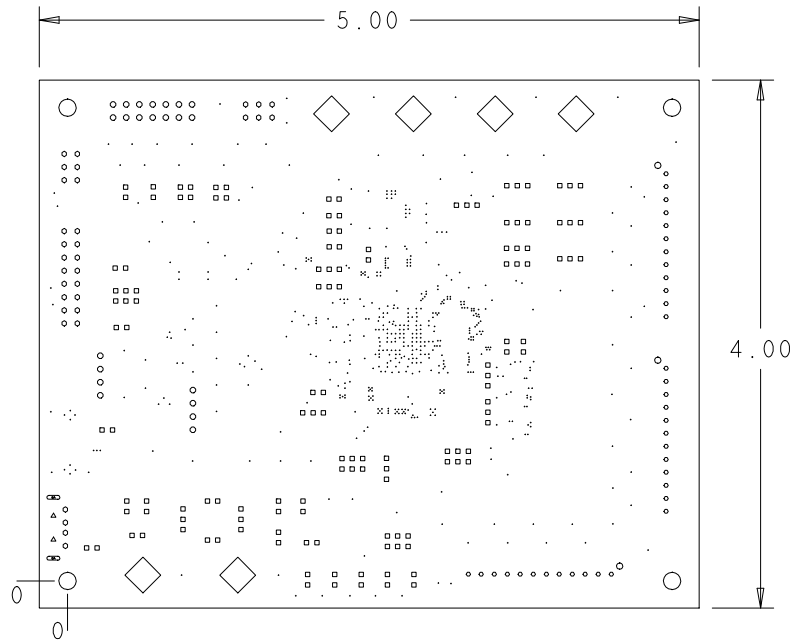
KIT34708VMEVBE (Rev. B) Bottom Layout Layer
